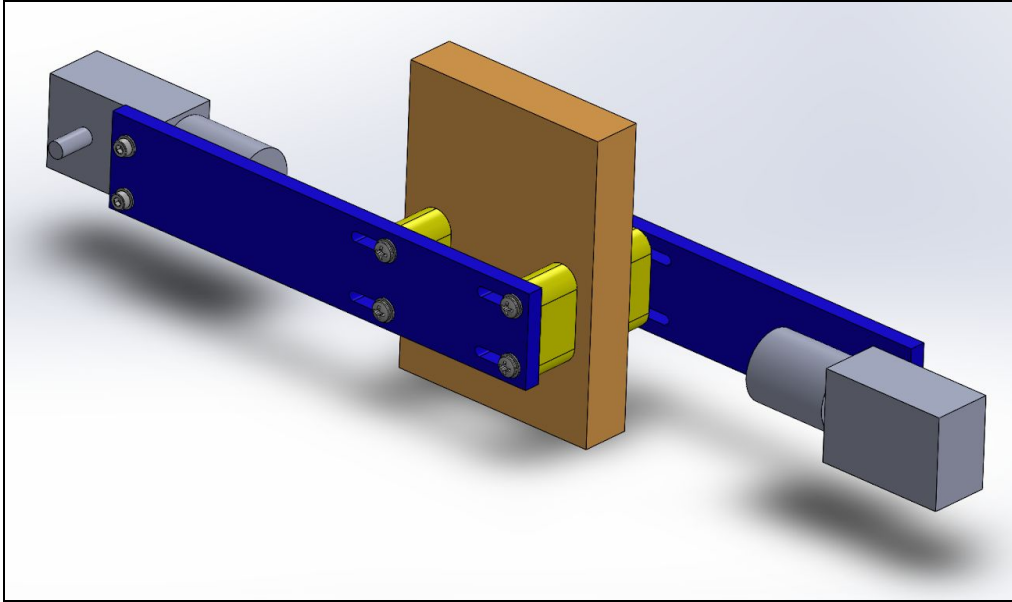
SolidWorks model of the worm gear motor mounts for the acrylic weather sheets, shown from the front side. The acrylic mounts are in blue, and the 3D printed spacers are in yellow. The small gears would be attached to the shafts on the worm gear motors.
